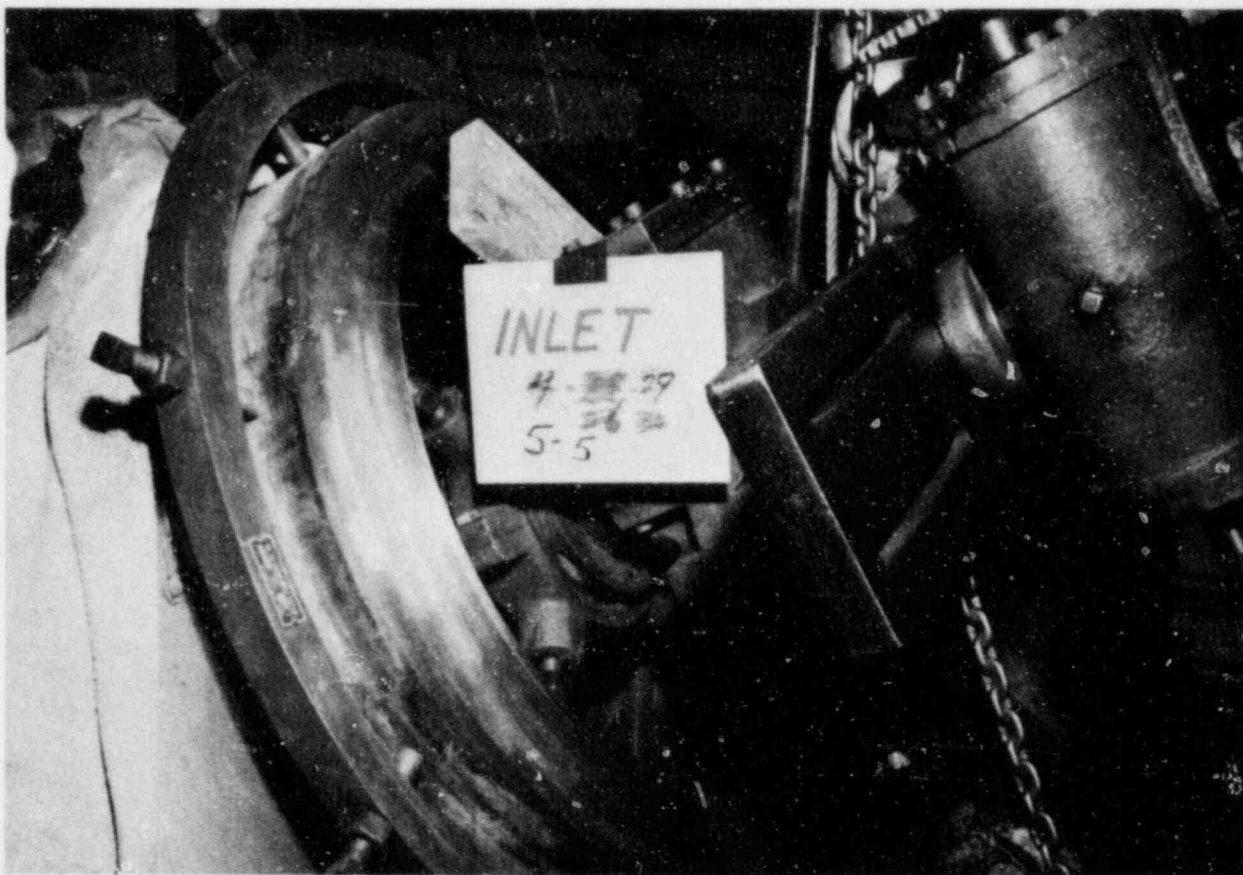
INLET NOZZLE - MACHINING OPERATION.
